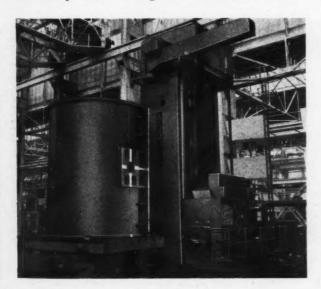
Typical set-up on one of the two Asquith ram-type travelling-column boring and milling machines. With the aid of several attachments, multiple operations are performed on the stator casing here shown
